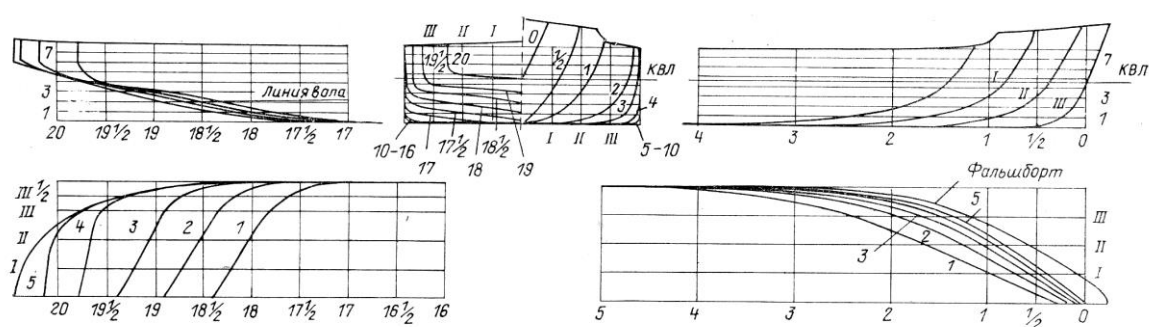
The line drawing of a river ship of the Volgo-Don type. Spoon bow. Sea sled stern.
